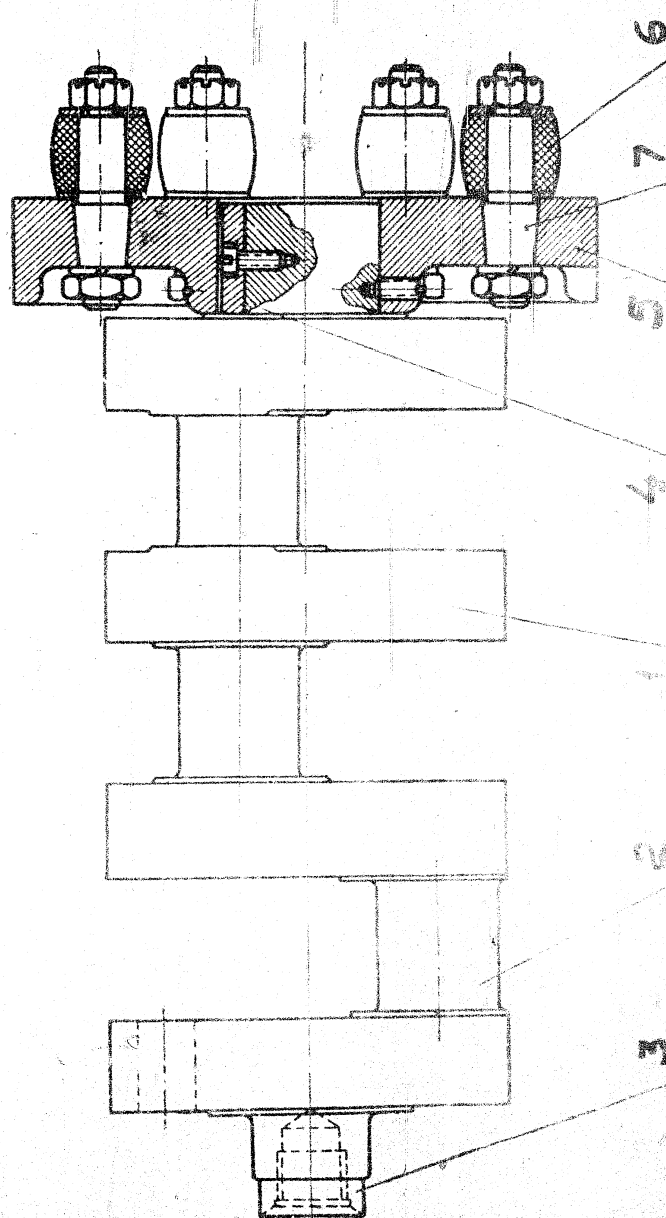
The crankshaft. 1-form-neck, 2-neck for connecting rods, 3- pump driving gear pivot, 4- clutch driven plate pivot, 5- driven clutch plate, 6- clutch rubber sleeve, 7- clutch finger.
